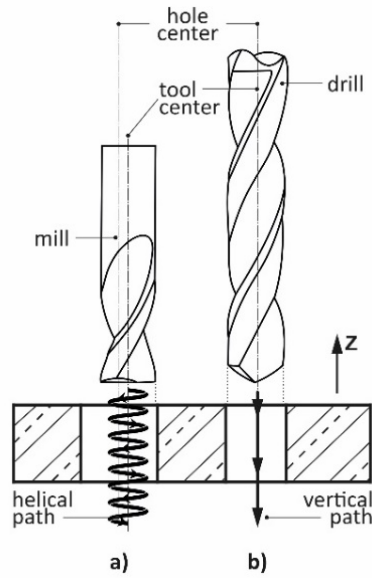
Schematic representation of a) helical milling and b) drilling (adapted image from Geier et al. [22])
